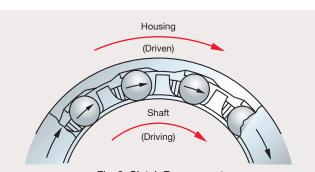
Clutch Engagement When the shaft turns to the right, the roller pressed by the action of the
